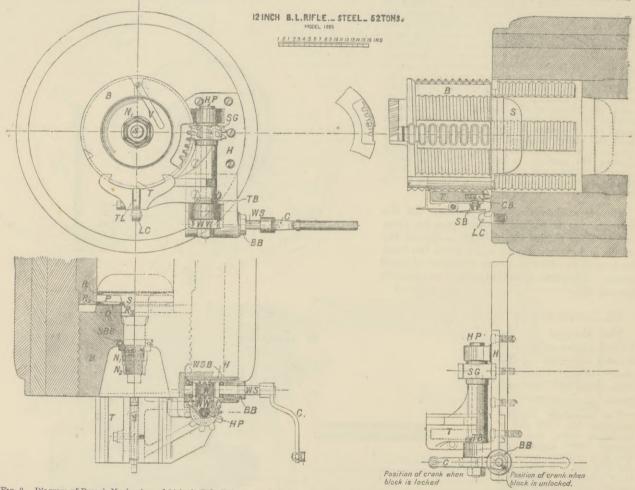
Diagram of Breech Mechanism of 12-inch B.L. Rifle (steel, 52 tons). B, breech-block; BB, bronze bushing; C, crank; CB, catch bolt; D, gas check disc; H, hinge-plate; HP, hinge-pin; LC, tray-latch catch; N₁, spindle nut; N₂, lock nut; P, gas check pad; R₁, R₂, R₃, split rings; S, obturating spindle; SB, spring bolt; SBB, spindle ball-bearing; SG, spiral gear; T, tray (console); TB, tray ball-bearing; TL, tray latch; V, vent-cover; W, worm; WS, worm-shaft; WSB, worm-shaft ball-bearings; WW, worm-wheel.
